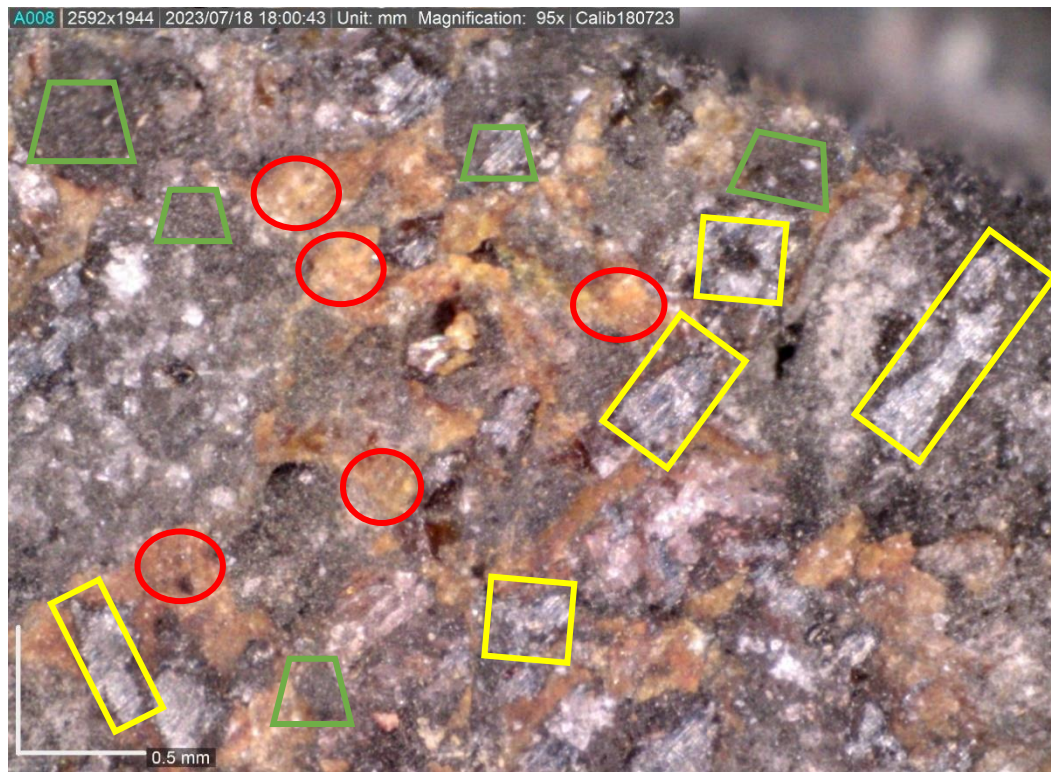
Condition of the edge of the MV3 grinding wheel following the grinding passes performed at 2000 rpm
